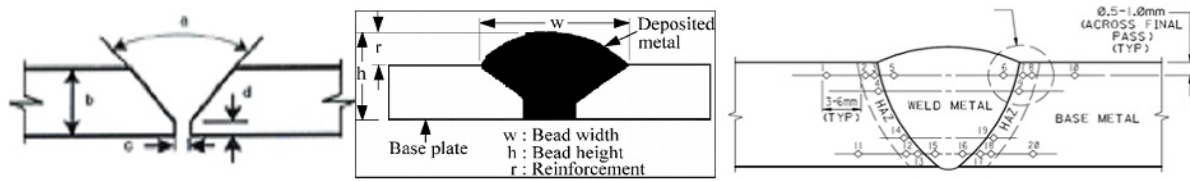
Weld Joint Design/geometry and hardness test location [WPS used for welding given in Annexure-4]
